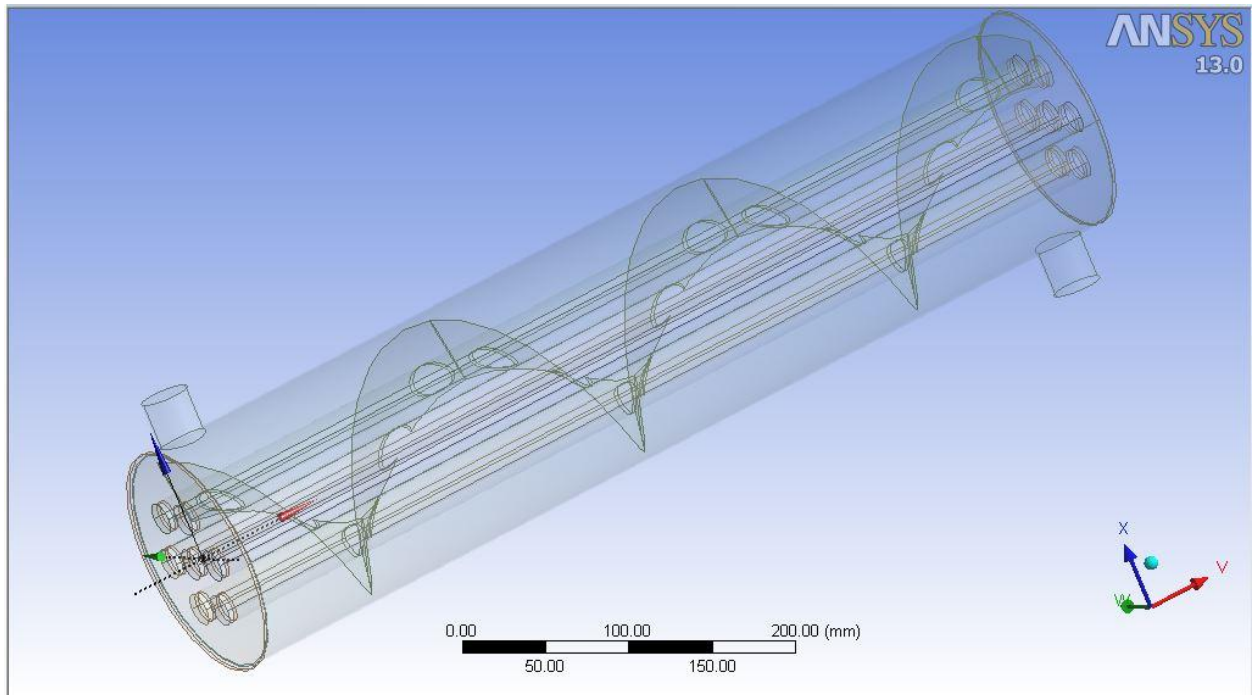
Isometric view of arrangement of baffles and tubes of shell and tube heat exchanger with baffle inclination.
